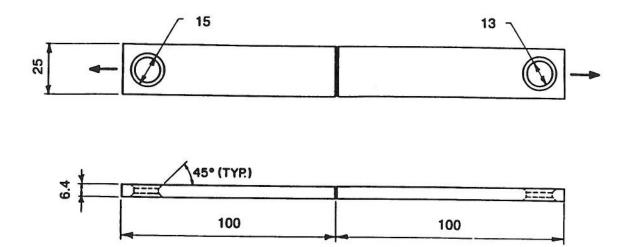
Bonded Specimen for Creep Tensile Tests; all Dimensions in mm
